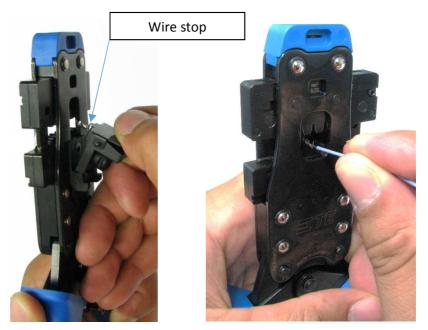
Position the terminal over the terminal holder (left), insert wire (right).
